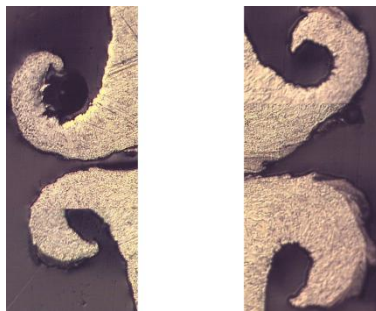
The curls of the large-upset-tests. Weld B24.
